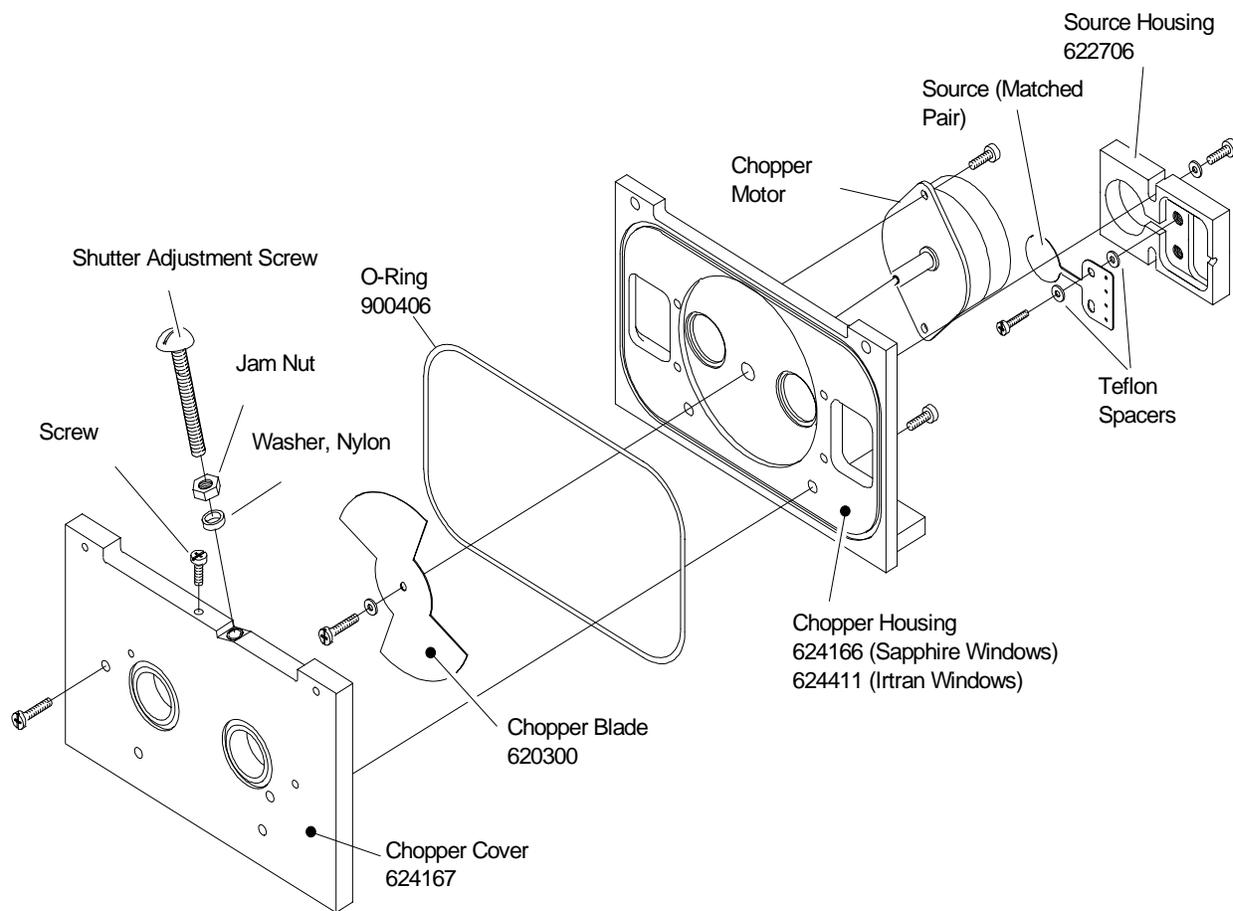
MOTOR/SOURCE ASSEMBLY
